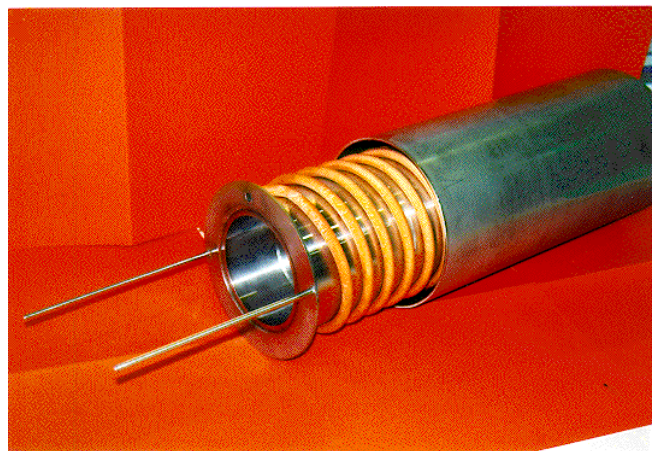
Welded components before hiping with the canister before hiping
